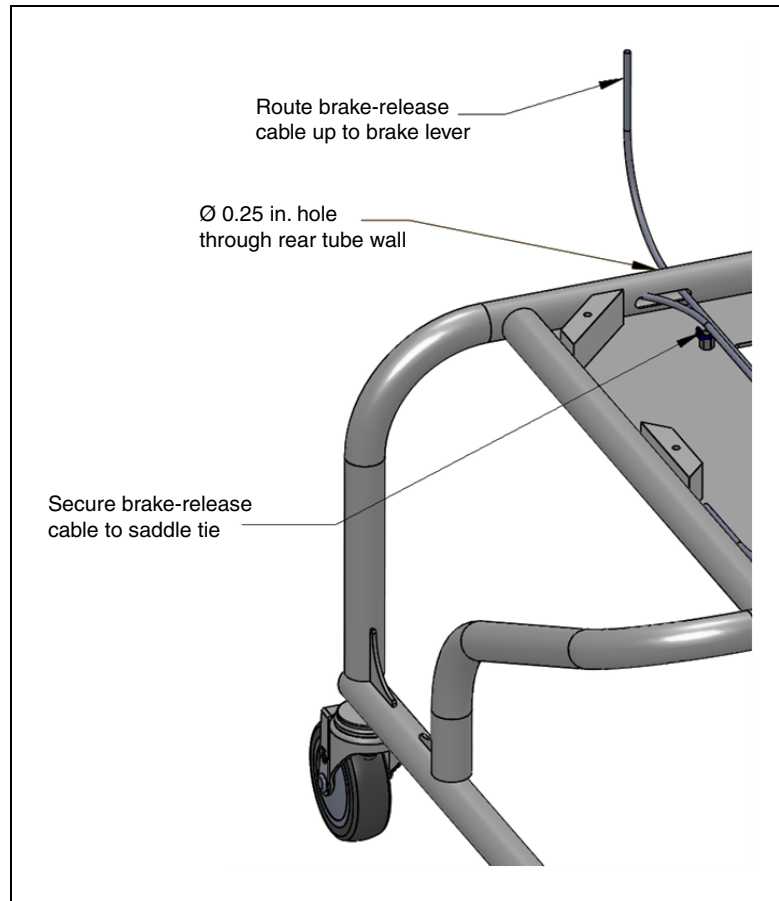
Thru-holes for Brake-release Cable, Plate Removed
